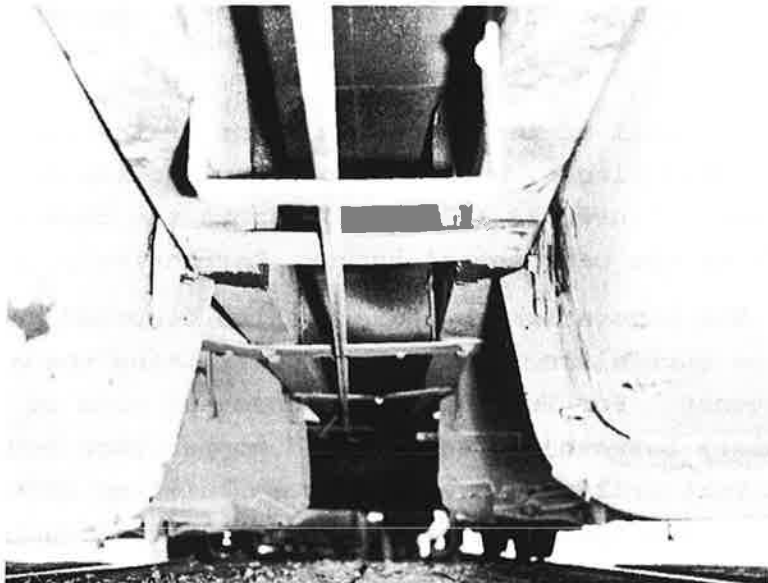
POST-TEST BUCKLE OF HOPPER CENTER SILL - TEST 3.
